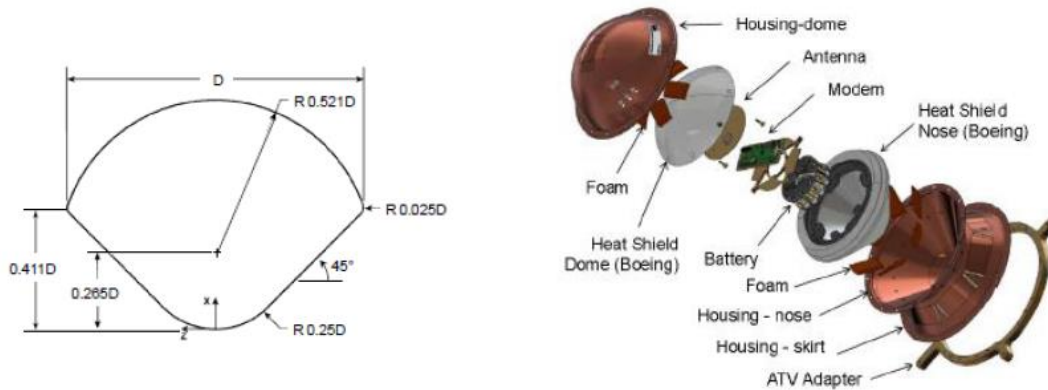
ReBR geometry ($D=31\text{cm}$) (left) and exploded view (right) from Ref. 1.
